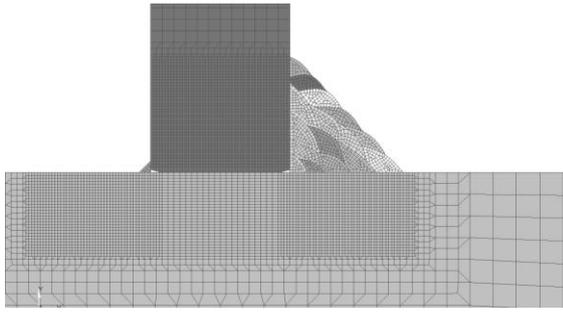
Discretization of a multistage welding process of a T-joint.
